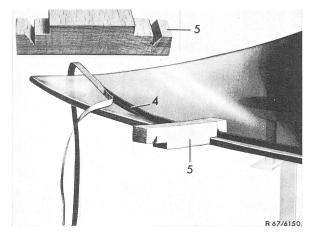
4 Rubber lip 5 Auxiliary tool for fitting rubber lip
